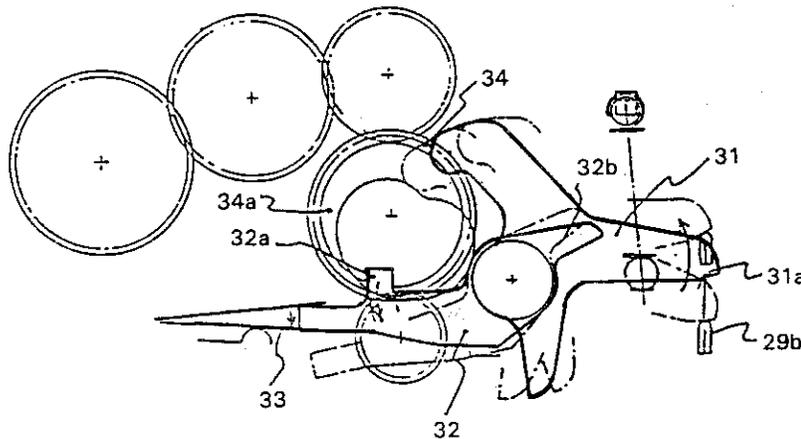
shows the mechanism of the Winding (upper) Assembly.
